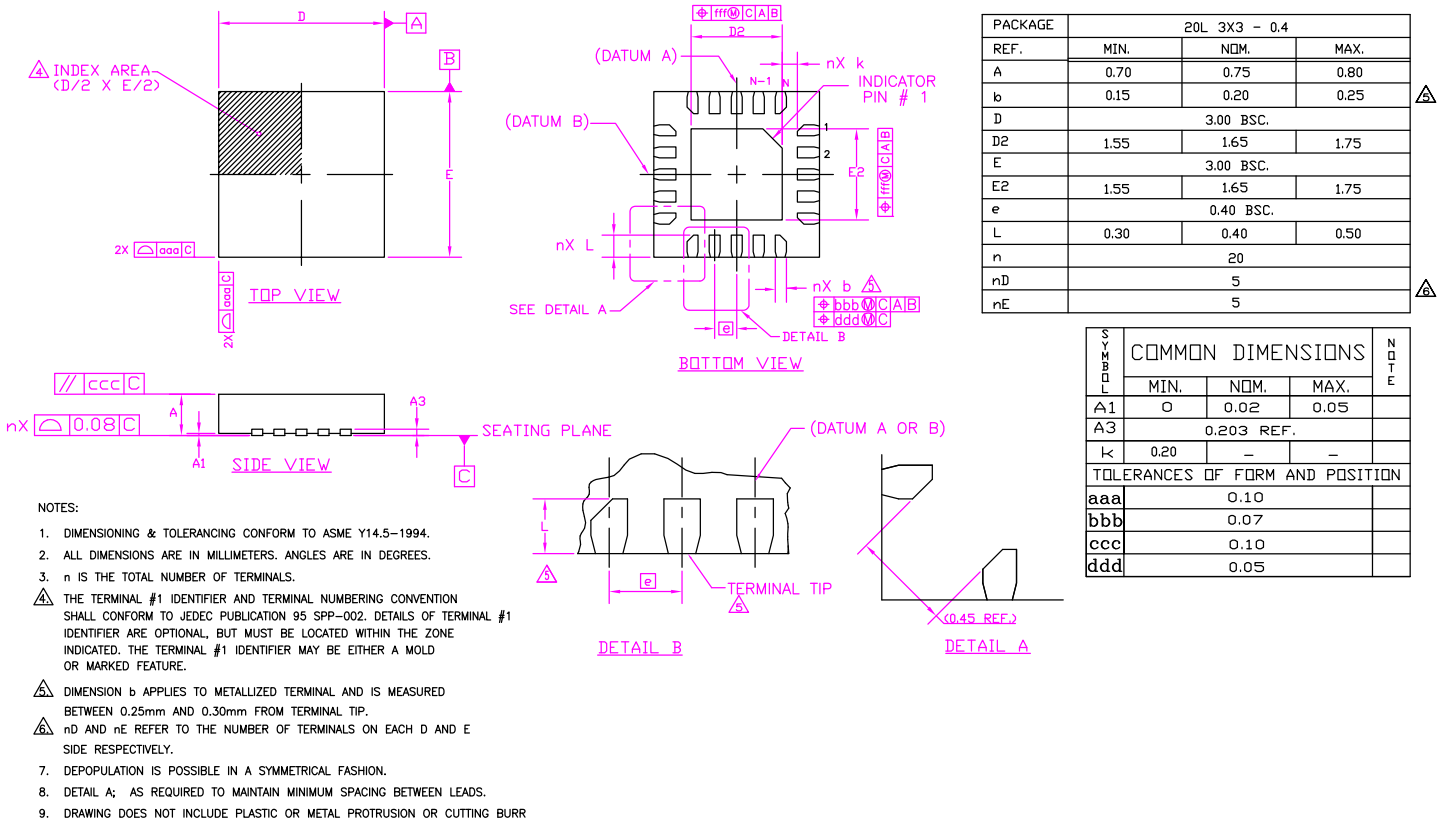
3mm x 3mm, 20-lead, 0.4mm pitch QFN Package Mechanical Drawing (Note: Drawing Not to Scale)
